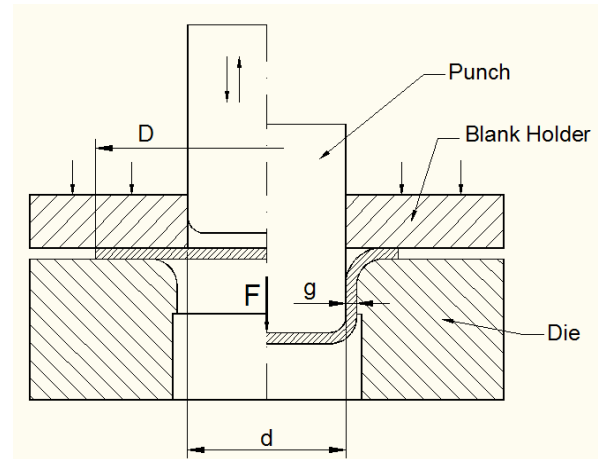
Principle of deep drawing of cylindrical parts, using planar blank holder
